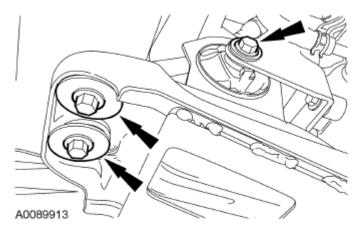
Locating Rear Nut And Engine Support Crossmember Courtesy of FORD MOTOR CO.
